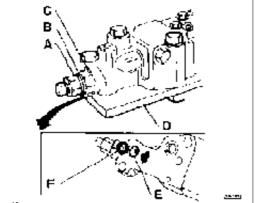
Hydraulic distributor control levers. A Spacer
